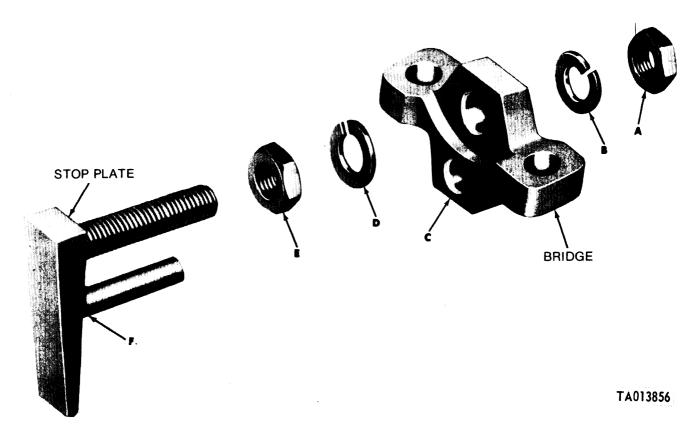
Disassembling stop plate and bridge assembly (code G pumps).
